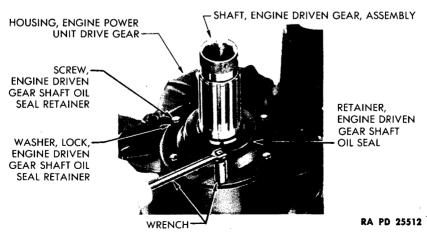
Tightening Engine Driven Gear Shaft Oil Seal Retainer Screws
